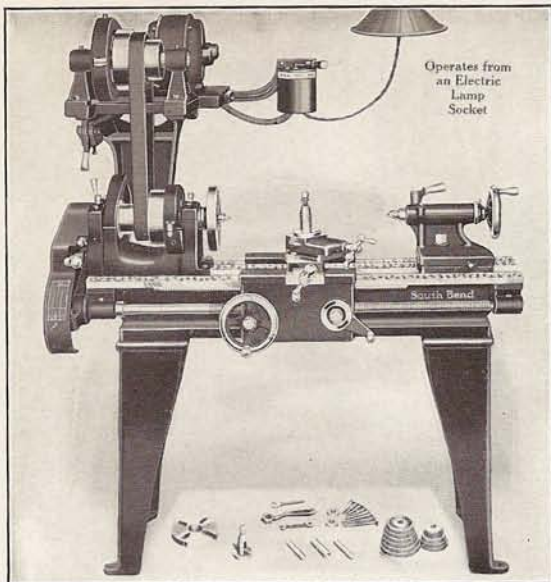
Improved Adjustable Belt Tension Countershaft for Horizontal Motor Driven Lathe.
